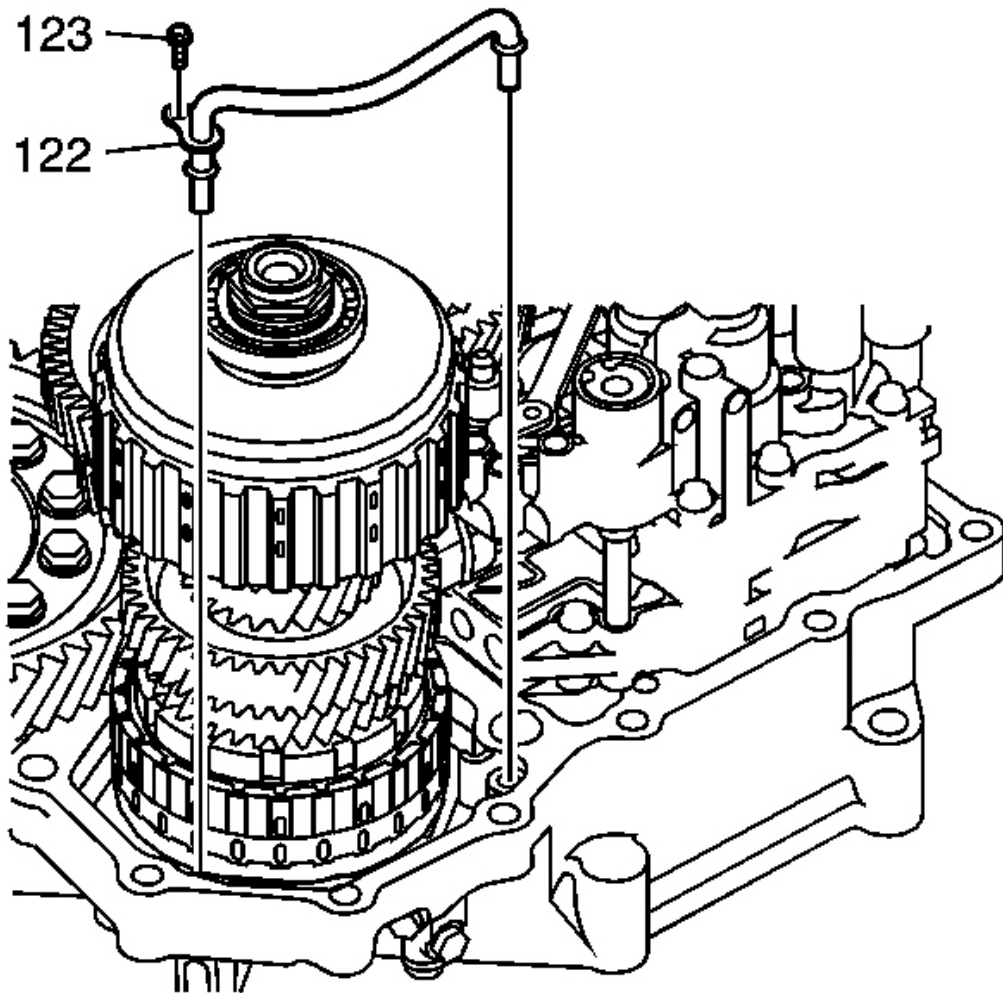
Clutch Shaft Fluid Pipe Retainer Bolt & Clutch Shaft Lube Feed Pipe
